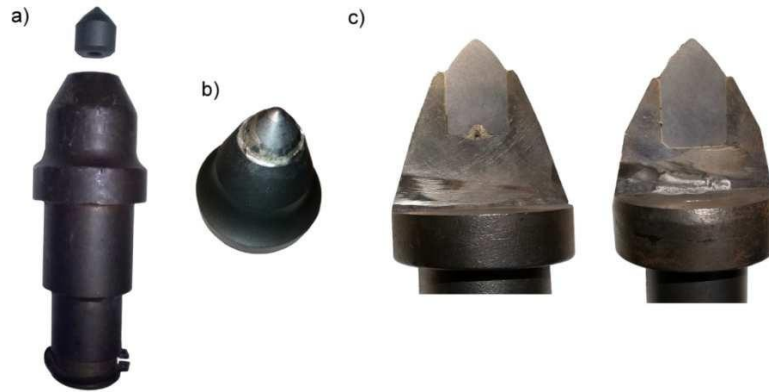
The conventional method of fixing a tip in a conical pick shaft by brazing: a) components, b) view of a fixed cemented carbide tip, c) cross-section through a solder connection
